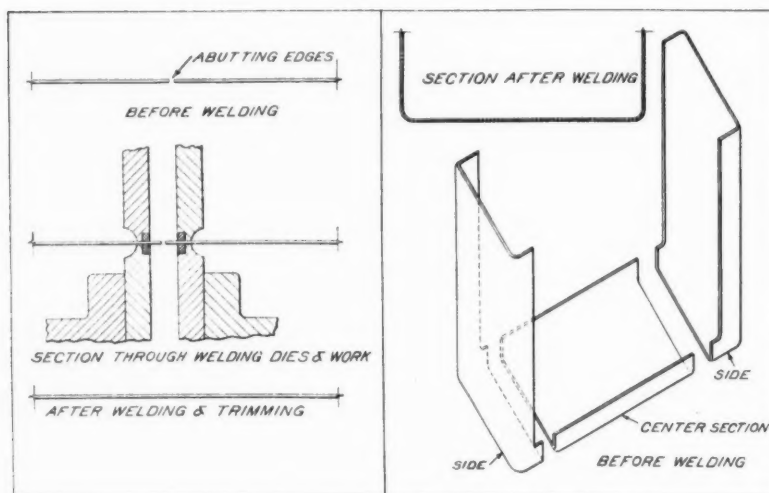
(Left) Principle Involved in Resistance Flash Welding
